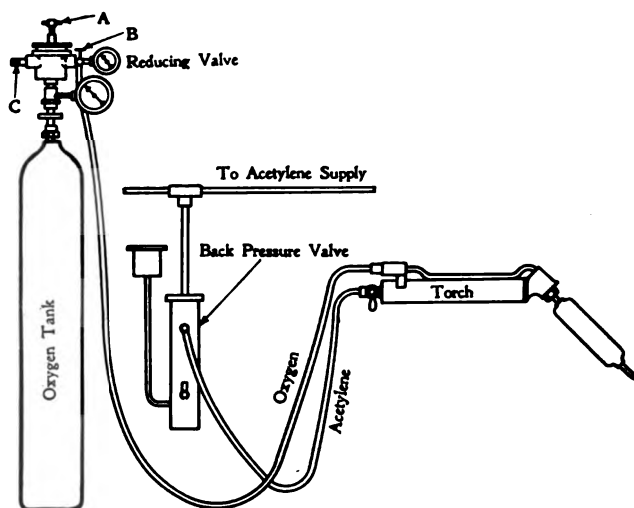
OXY-ACETYLENE WELDING OUTFIT
